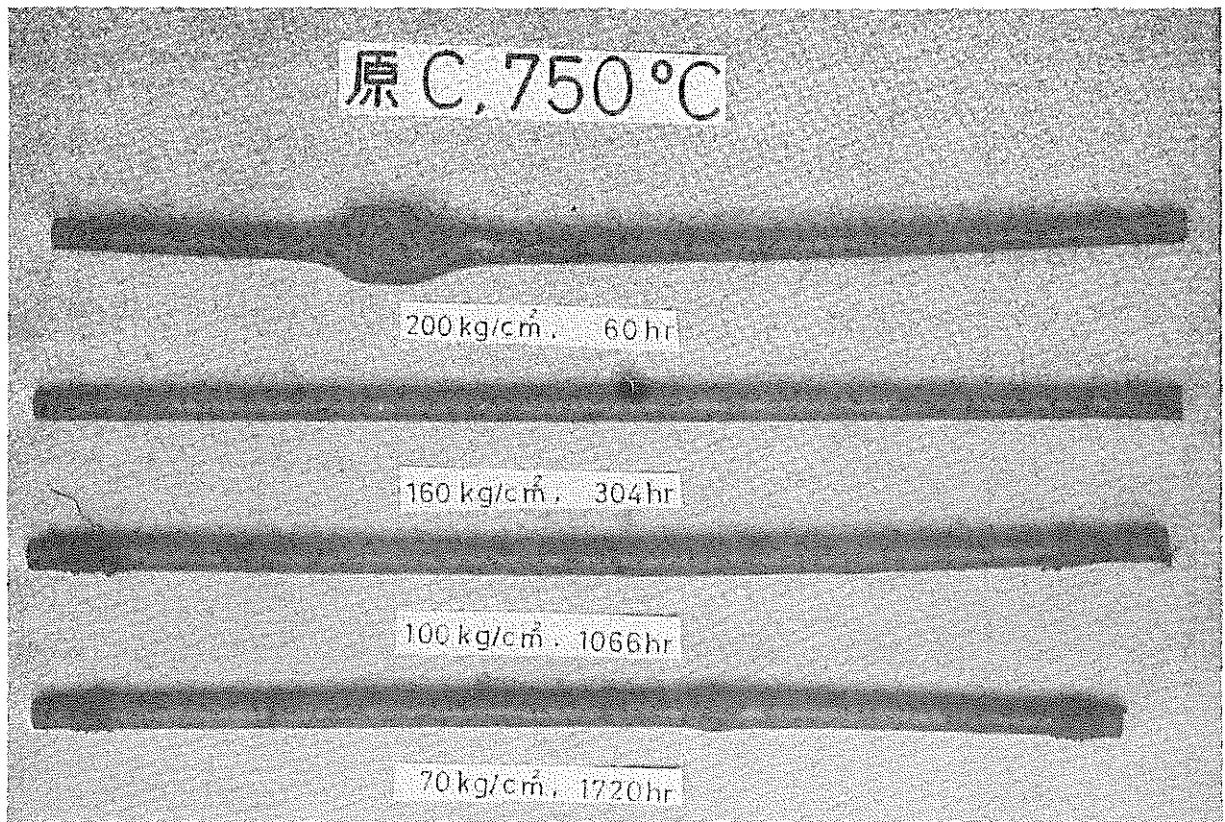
Appearance of Test Pieces after Internal Pressure Creep Rupture Tests (C material)
